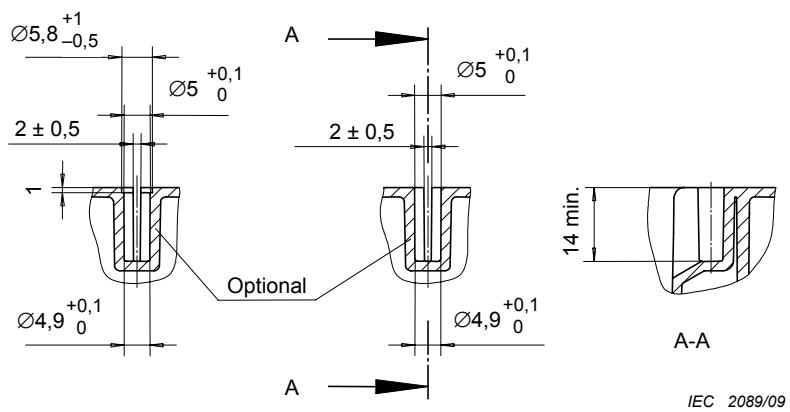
Recessed holes for terminal protection cover (detail “K”)
